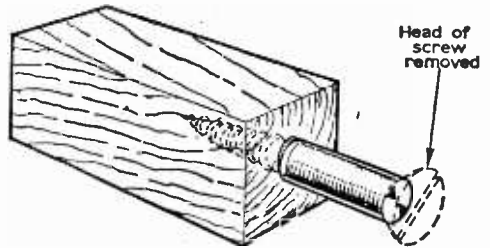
A suitable bobbin holder for use with a geared brace for winding.
